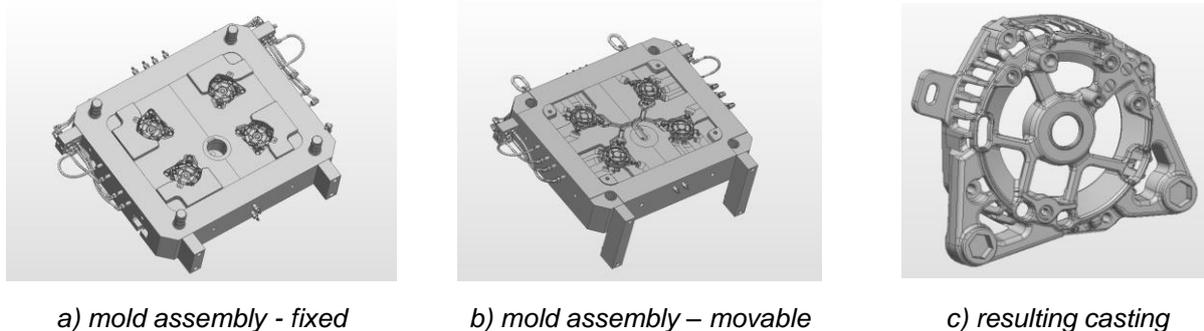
Example of mold for aluminum die casting and casting for automotive industry
